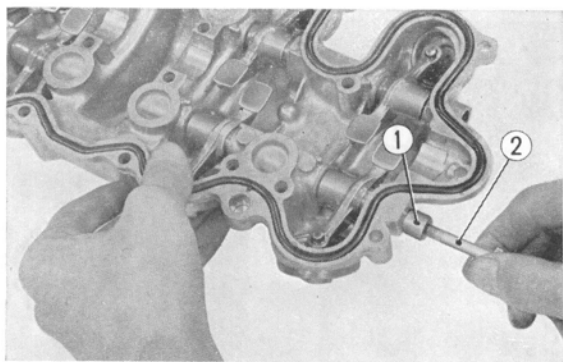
① Rocker arm shaft ② 6 mm bolt
